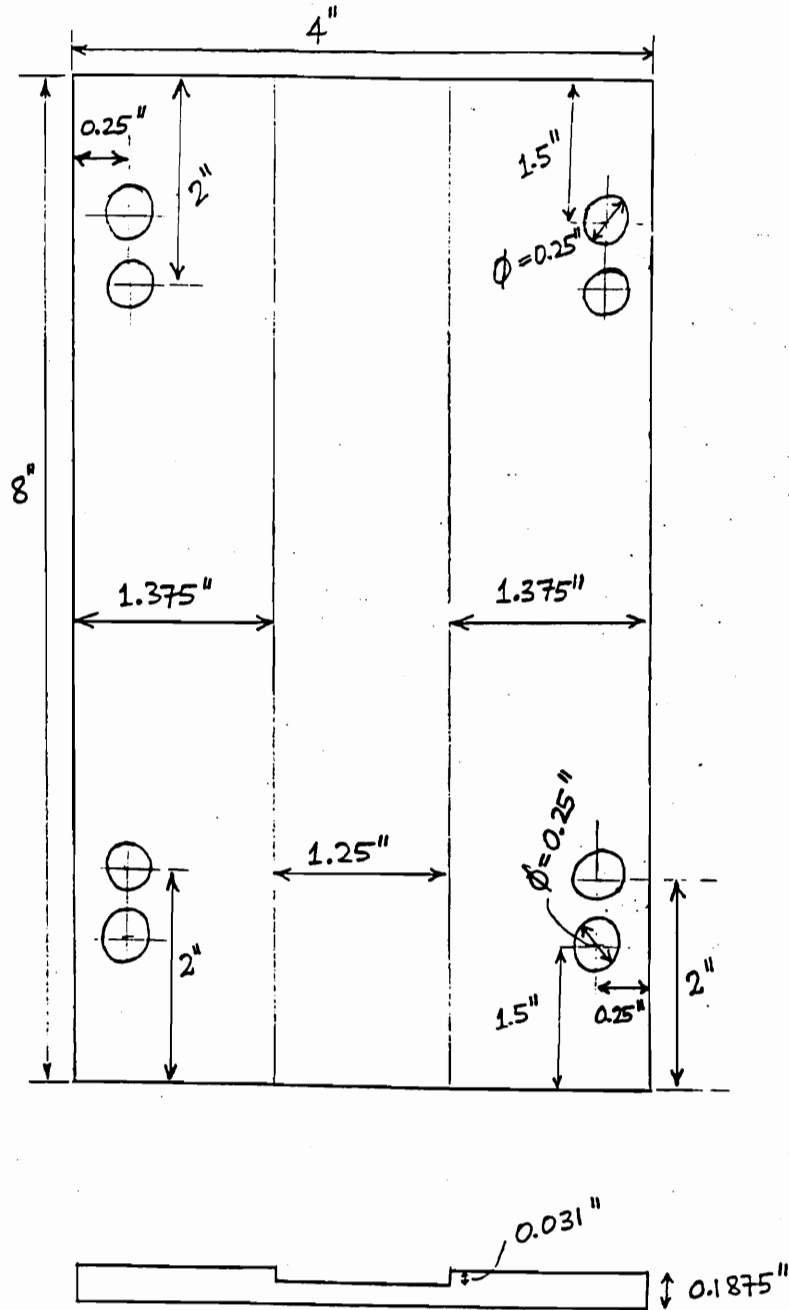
(b): Design dimensions of the aluminum plate onto which the borosilicate glass is attached.
